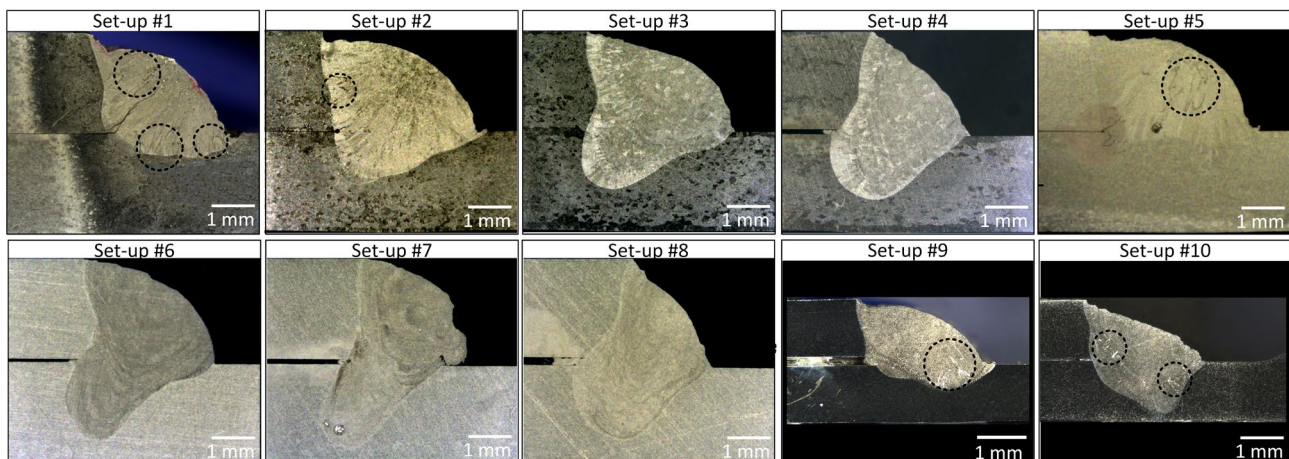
Representative cross-sections in all welding configurations in Table 3 with micro cracks addressed by dashed circle.
